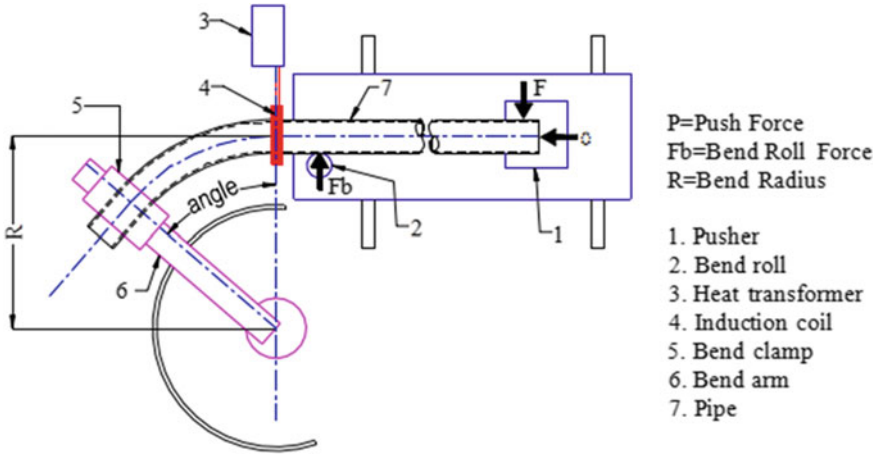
Schematic of induction bending machine from A.K. Dev, *Introduction to Induction Bending* [9]
